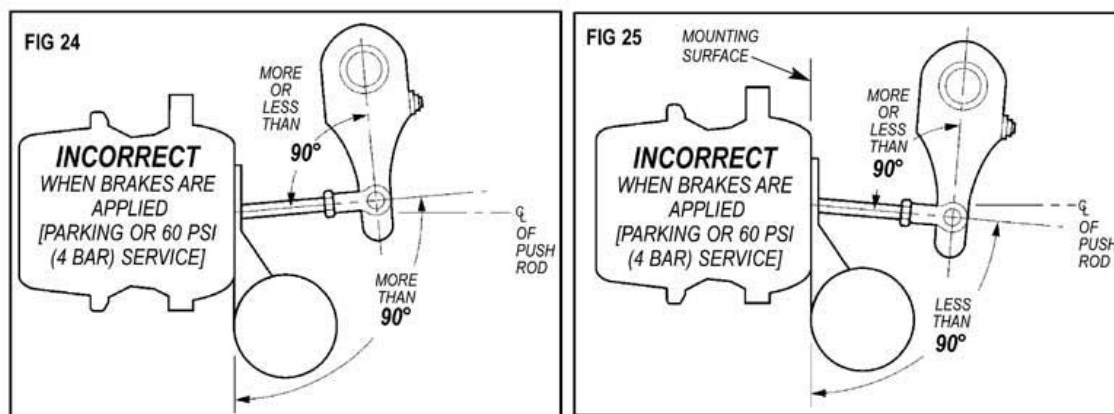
a.) shorten push rod, b.) align spring brake on mounting bracket, c.) mount clevis in proper brake adjuster hole.
